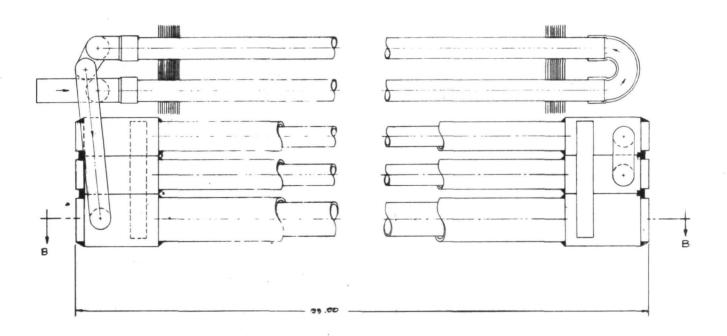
53 Cross Section of Boiler Tube Bundle Across Wide Dimension.
